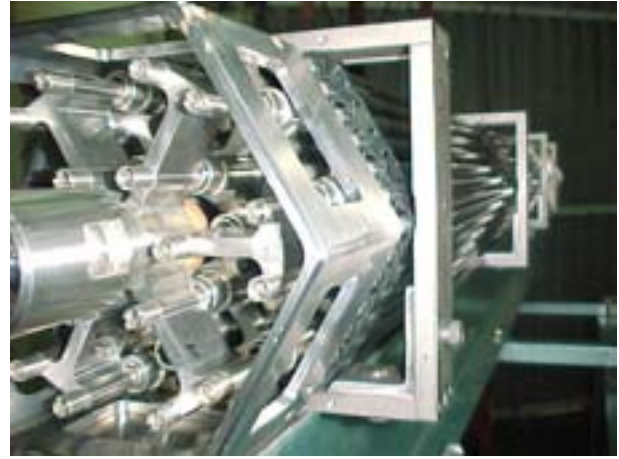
Upper grid box with the control rods assembly inserted in the guide tubes.
